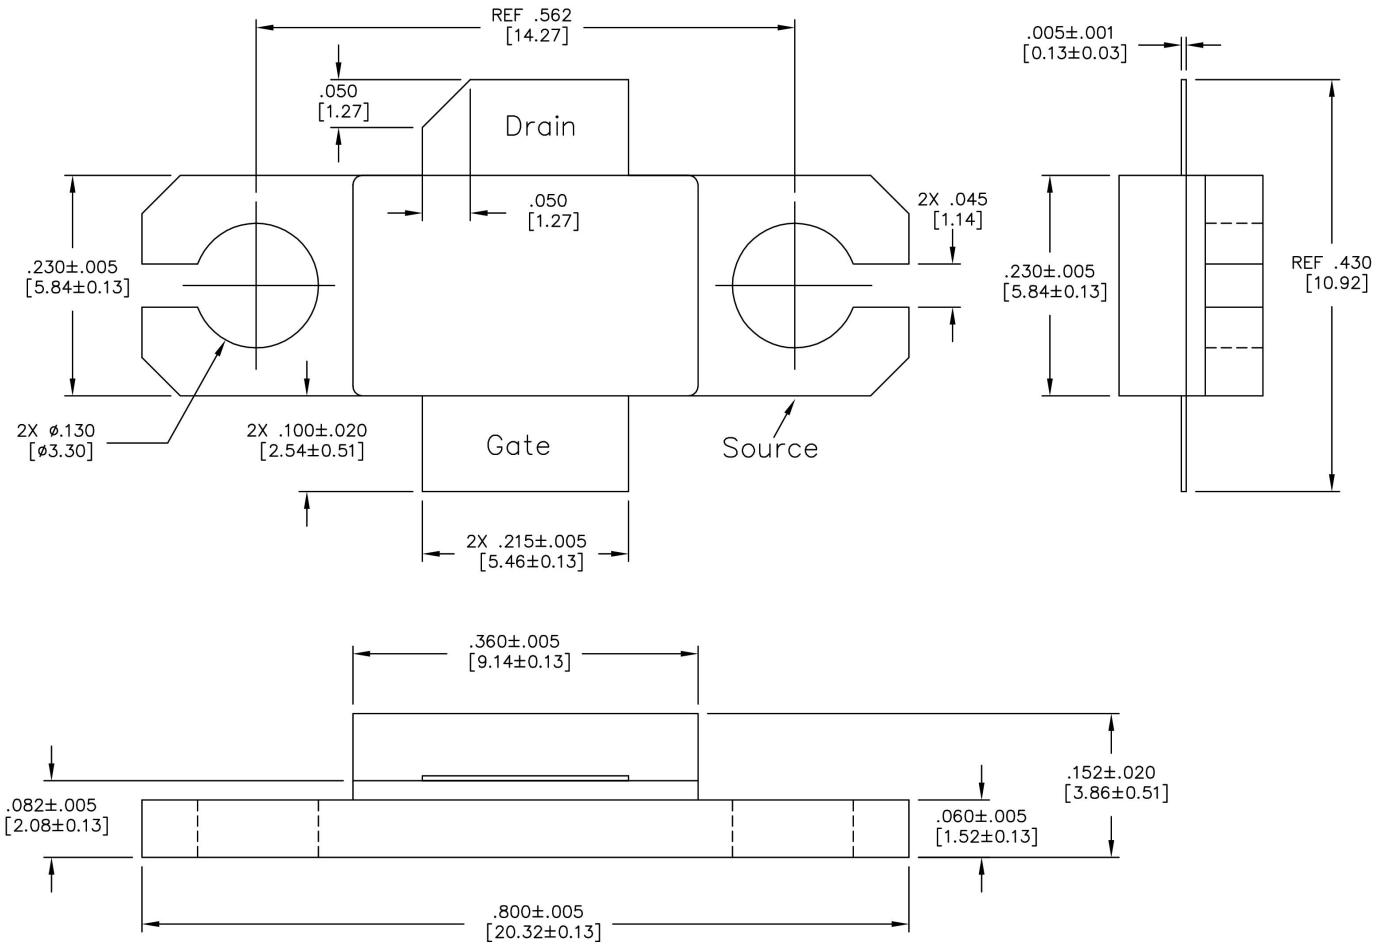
AC360B-2 Metal-Ceramic Package Dimensions (all dimensions in inches [millimeters])
